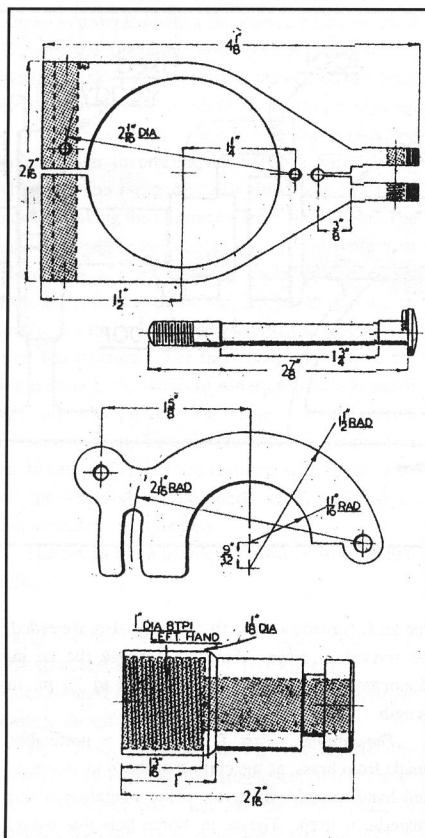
Drawings of the parts requiring modification when the attachment is applied to the Myford ML7 lathe.
